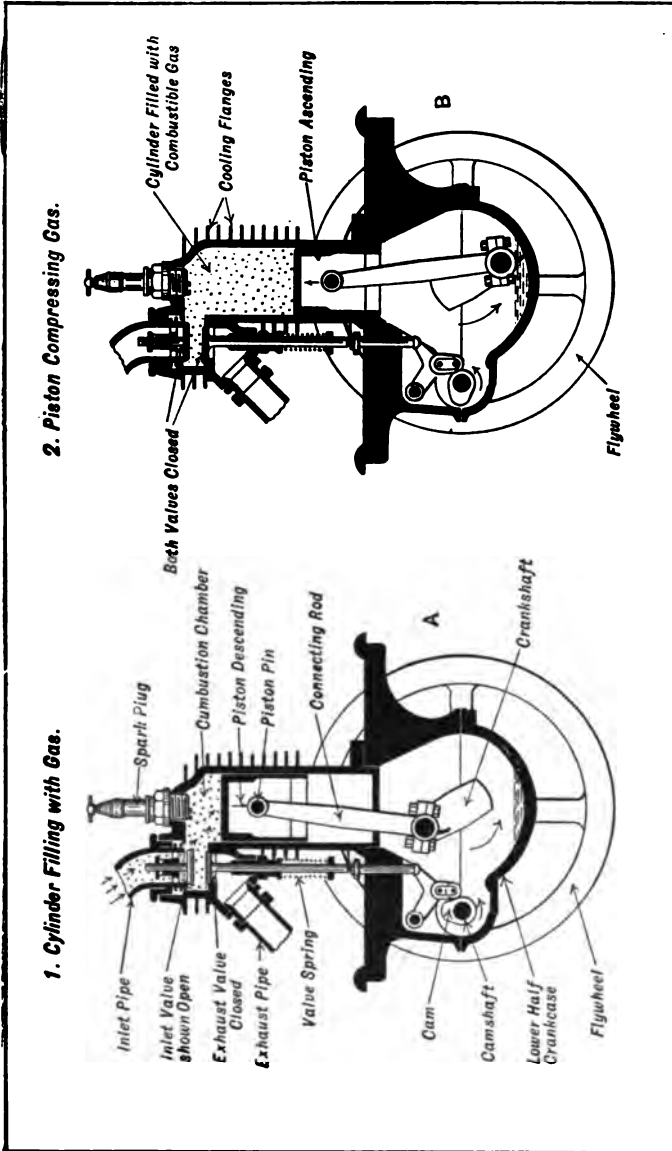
Views of simple four-cycle engine, showing methods of charging cylinder with explosive gas and compressing it prior to ignition.
